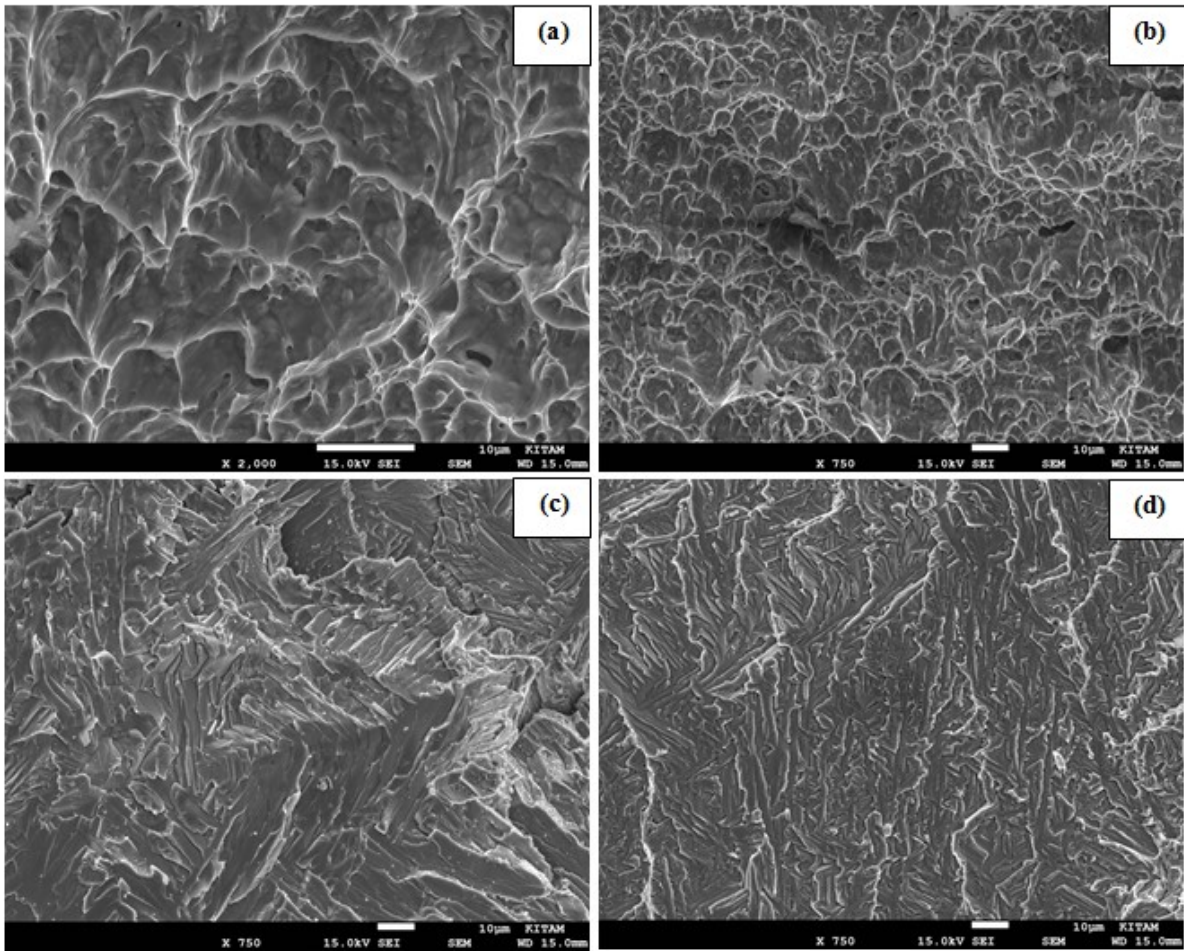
Fracture surface images of base metal and laser welded samples after The Charpy V-notch impact test, (a) Sample A, (b) Sample B, (c) Sample A1, (d) Sample B1
